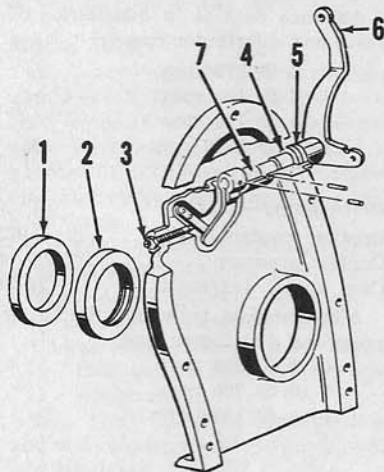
Timing gear cover, and governor operating lever and fork assembly.
